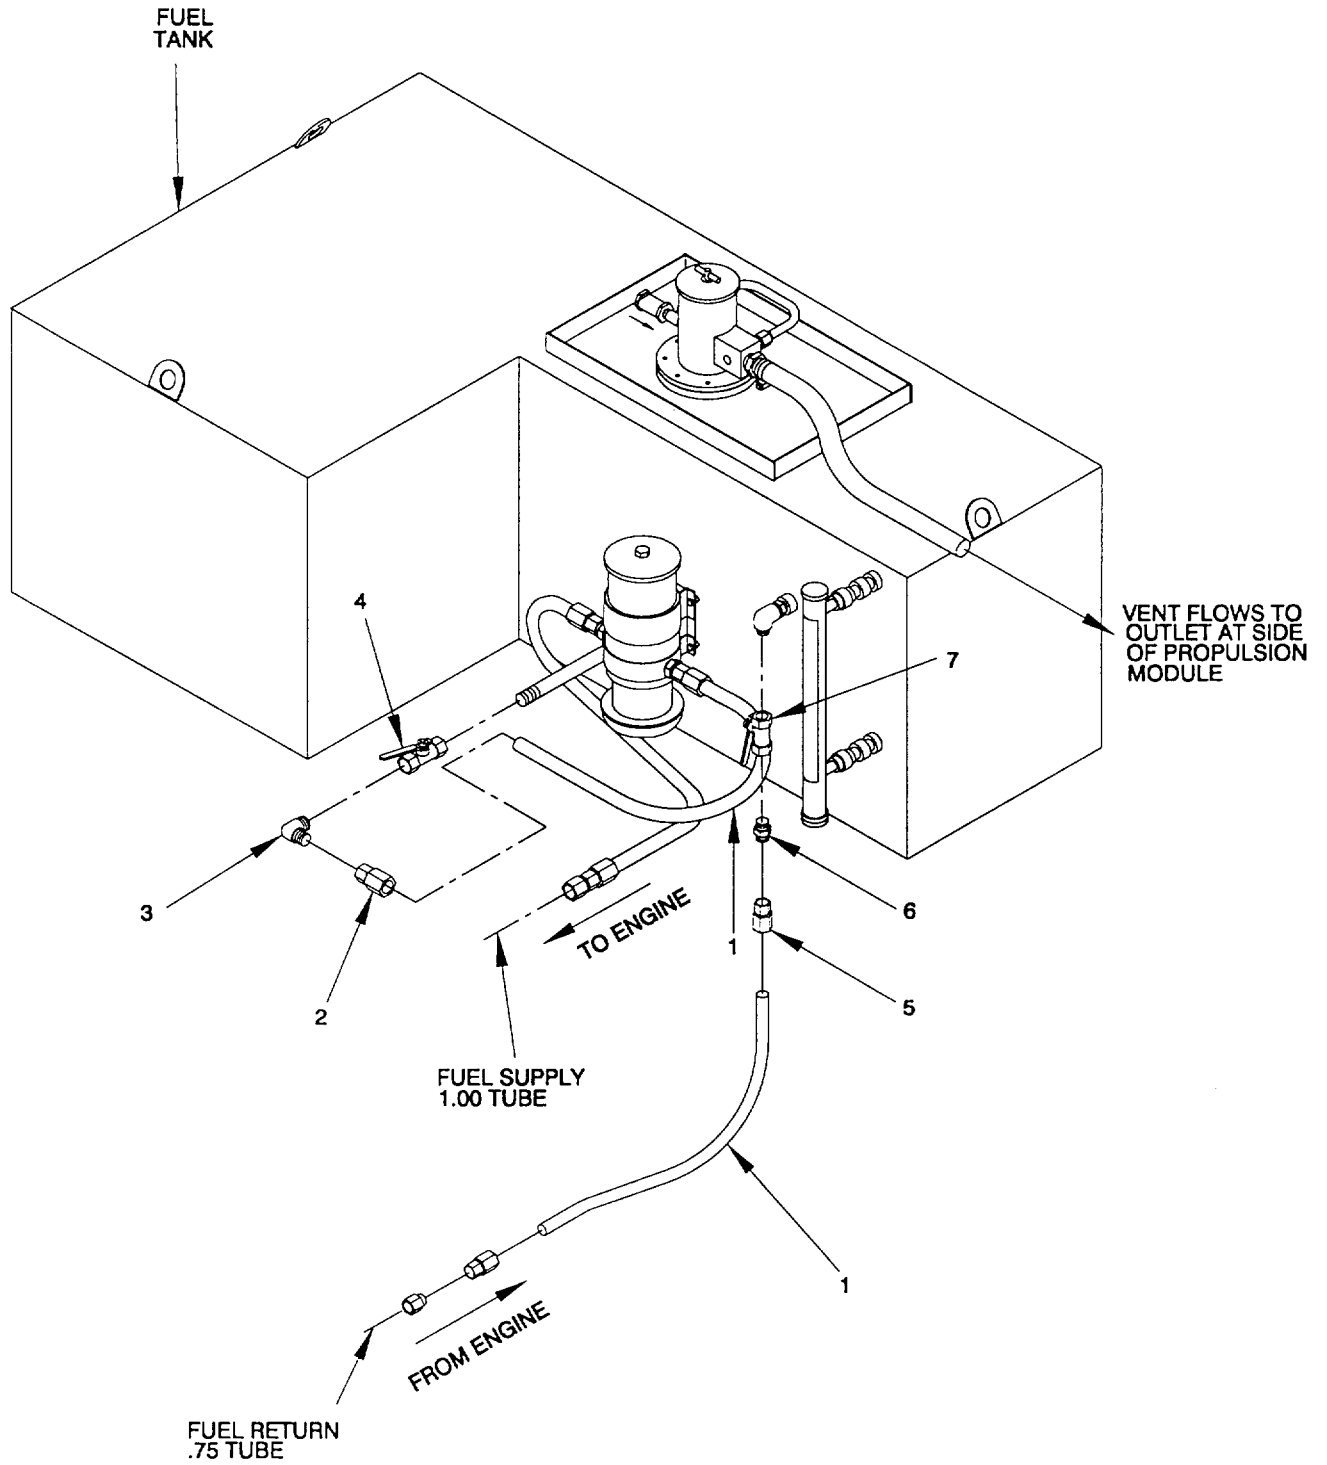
Ball Valve, Fuel System, Remove/Install.
